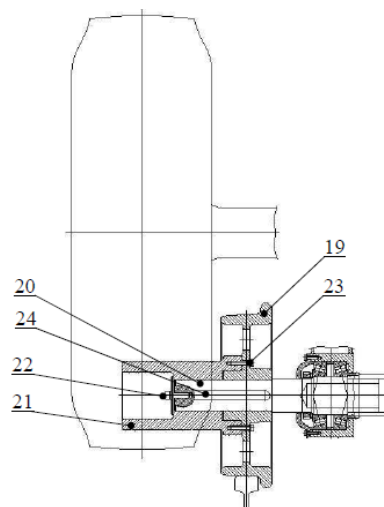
Rail running gear system with fixed rollers - drum drive of rail axle
